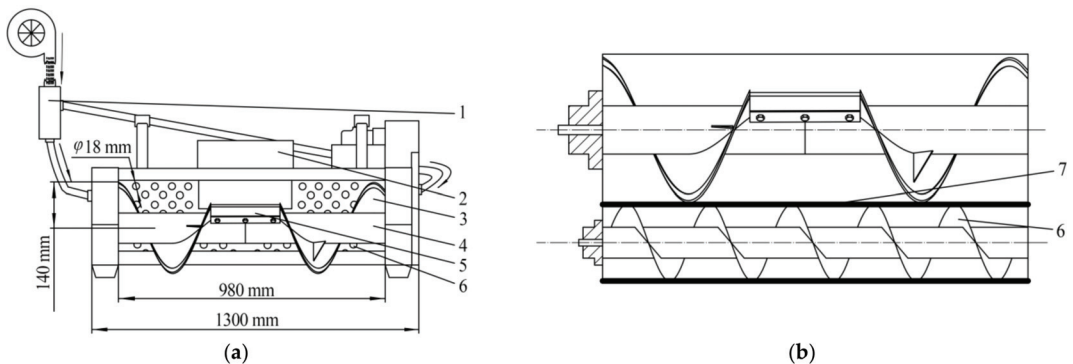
Cleaning system scheme of ear-picking device. 1. Pneumatic assisted seed cleaning system 2. Auger discharge port 3. Auger blades 4. Ear-conveying auger 5. Scraper 6. Sieve hole cleaning device 7. Auger-type kernel recovery device. (a) Top view, (b) Main view.
